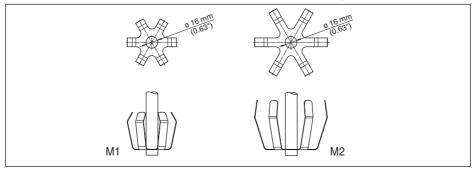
Spacers of metal for rod versions with ø 16 mm (0.63 in)
